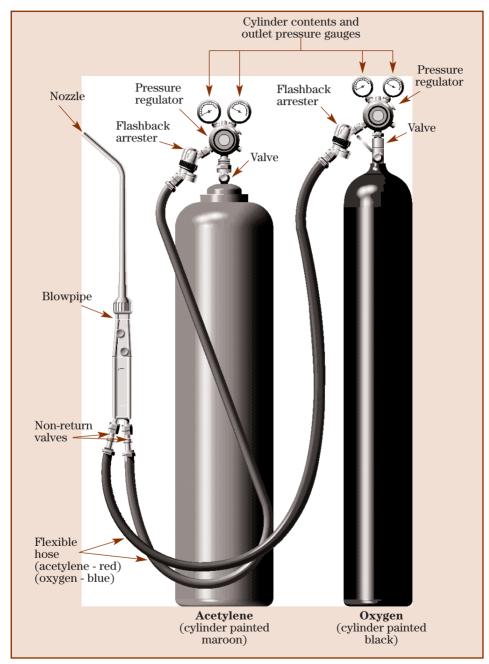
Typical equipment used in gas welding and similar processes
